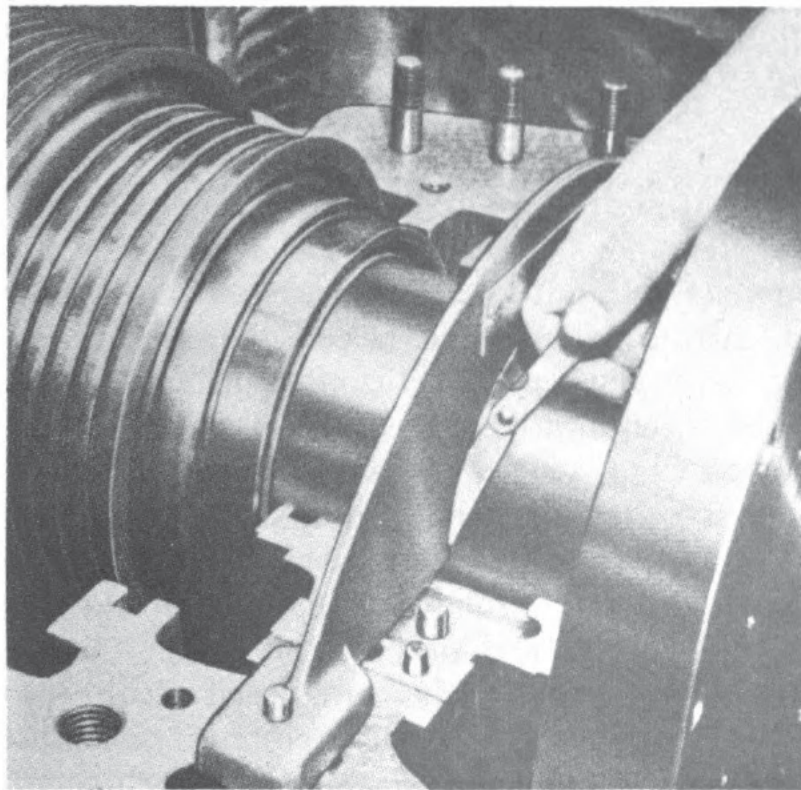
Taking a horizontal measurement with a bridge gage.
